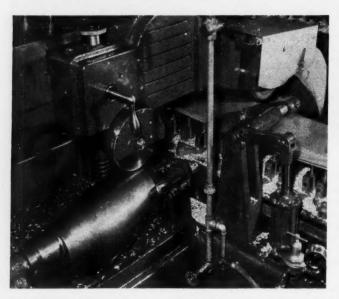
Rough milling camber side of rough blade forging. The movement of the cutter is controlled by α cam wheel operating in conjunction with α cylindrical cam.
